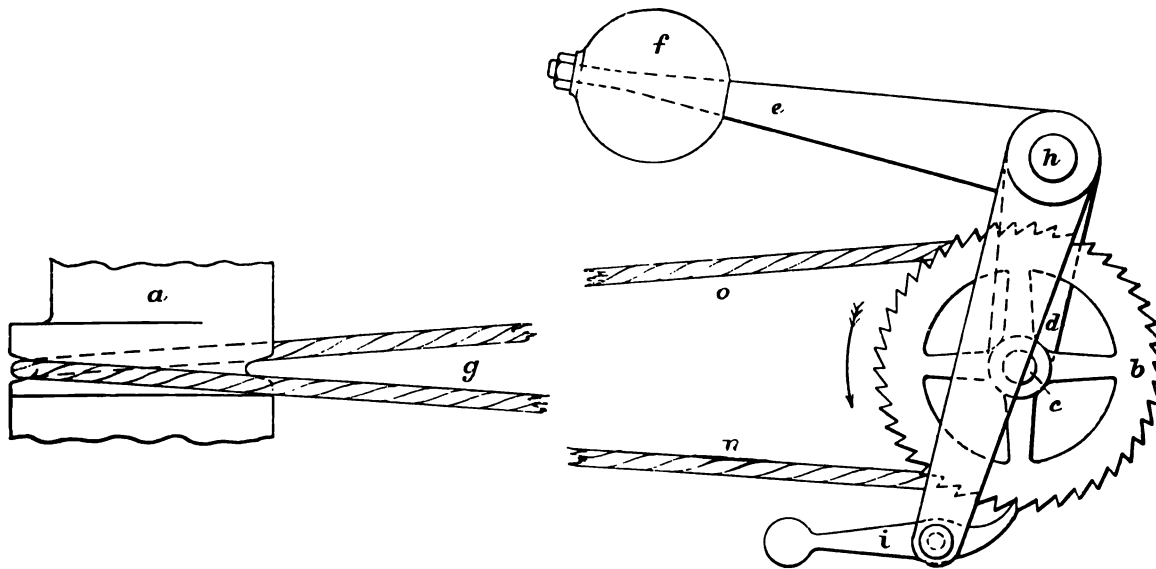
METHOD OF SECURING STAMP ROTATION.
